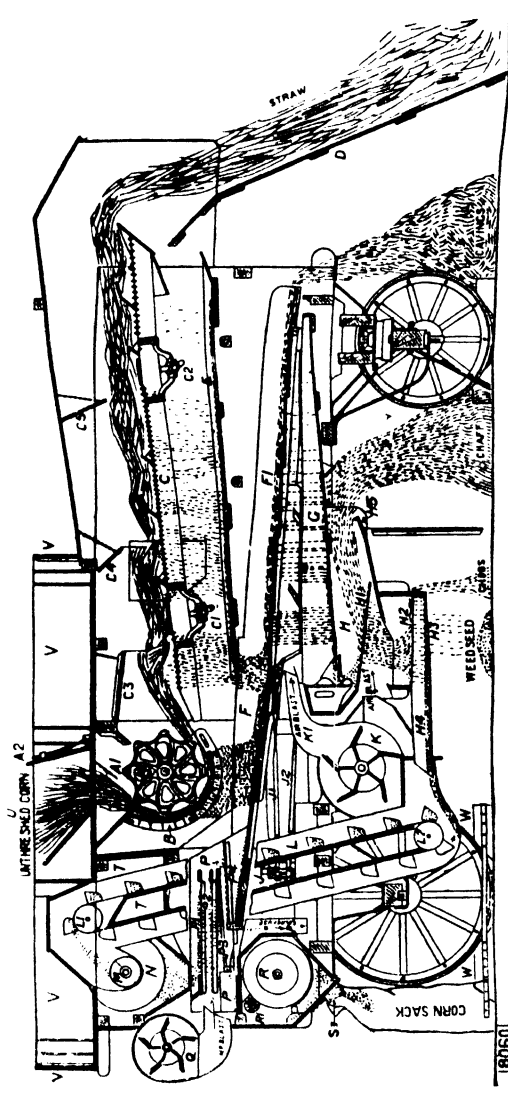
SECTION OF THRESHING MACHINE. LONGITUDINAL VERTICAL SECTION.
